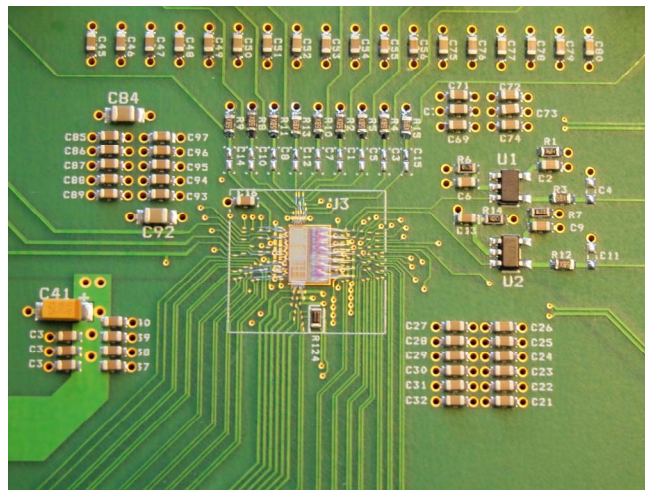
Close-up photograph of HIPPO custom test board showing direct wirebonding to board assembly.
